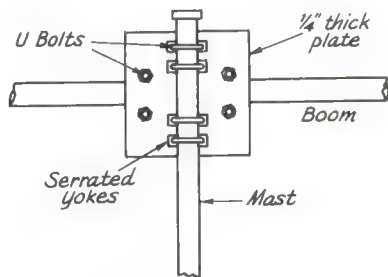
A method of mounting a one-piece boom less than 15 ft. long. The plate should be at least ¼ inch thick, and 10 to 12 inches square. Serrated yokes between the plate and the mast reduce the tendency for the boom to slip on the mast. This type of junction is also suitable for element-to-boom mounting.
